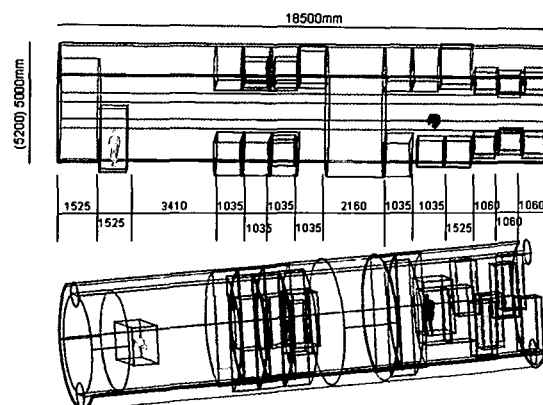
5: CAD Drawing – Measurements of the Transfer Habitat
